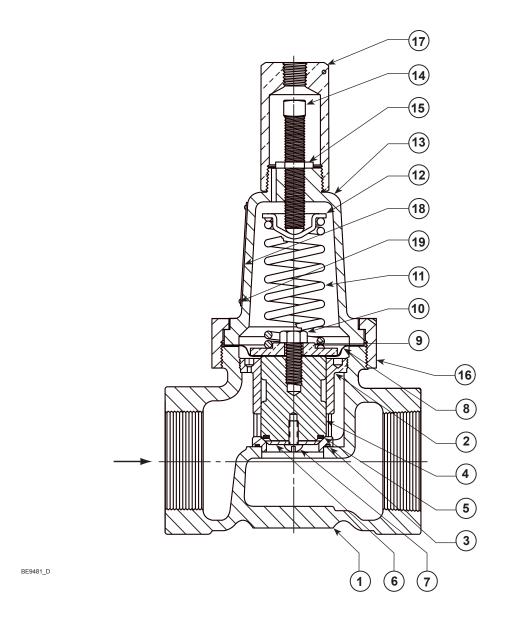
Type 1805-3 Relief Valve Assembly (Also typical of 1805 relief valves)
